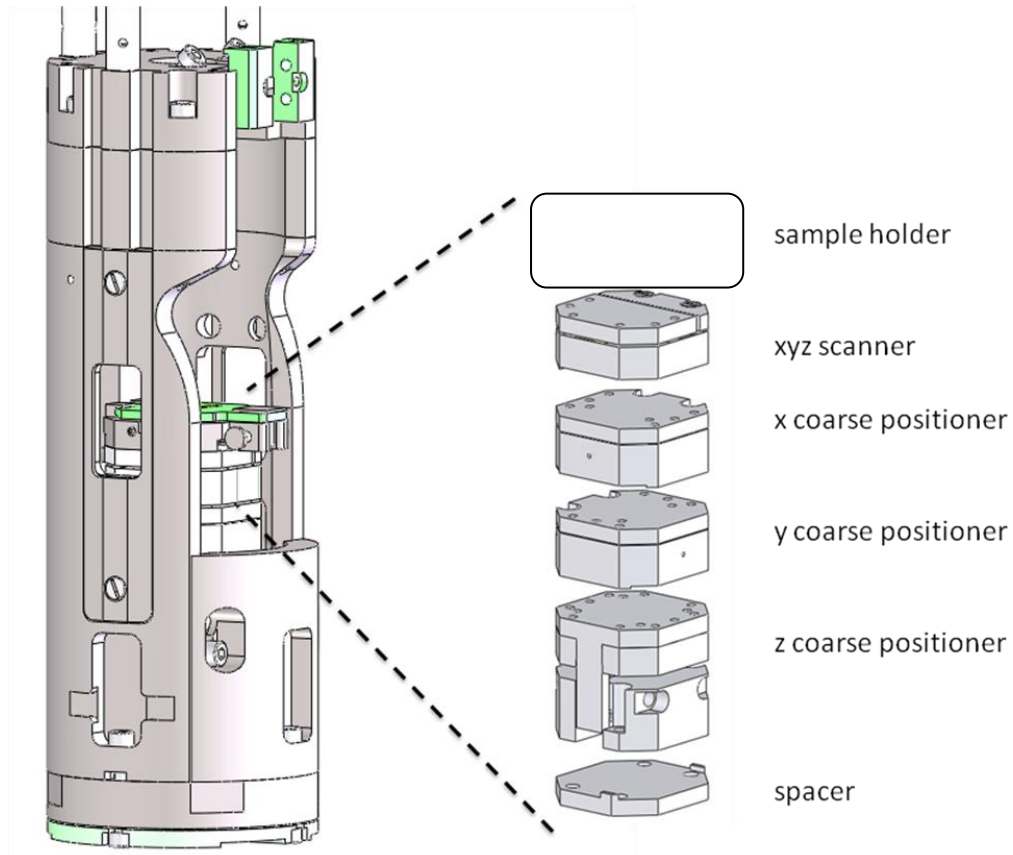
Standard assembly of the stack with a lower coarse-positioning unit and an upper scanner unit. The sample holder is specially designed for the 3He system.
